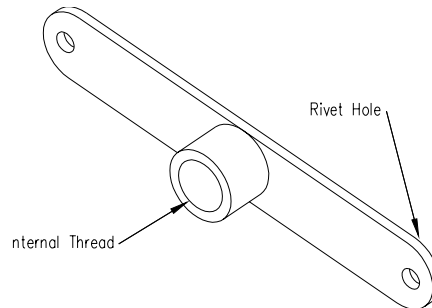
The aircraft fastener is riveted to the aluminium sheet
